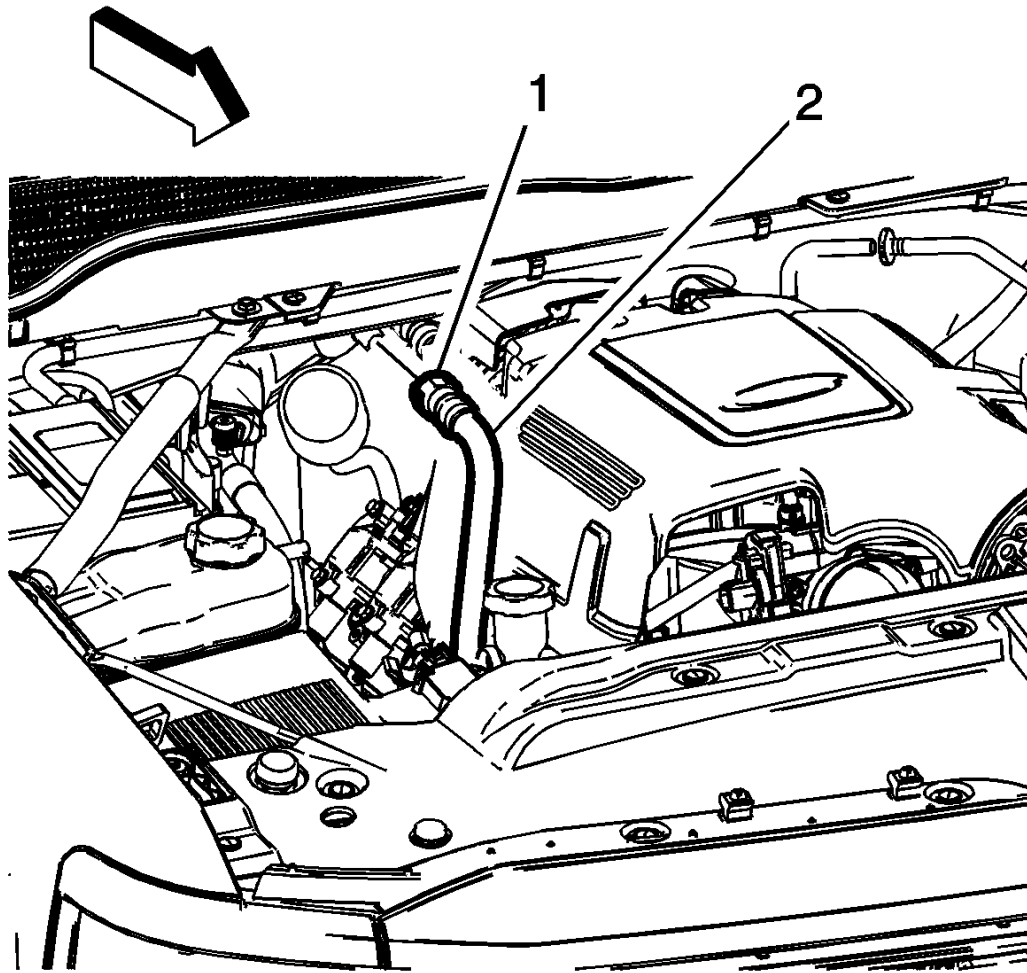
Radiator Surge Tank Outlet Hose Clamp At Heater Core Outlet Tube
